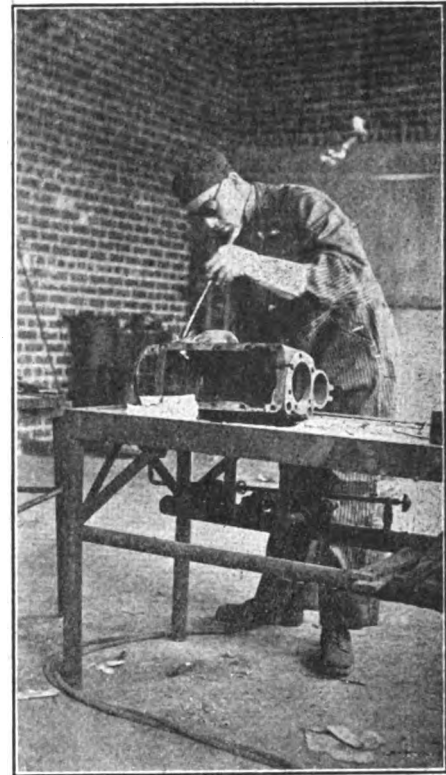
THE CASE PLACED ON ITS SIDE TO KEEP WELD HORIZONTAL.
